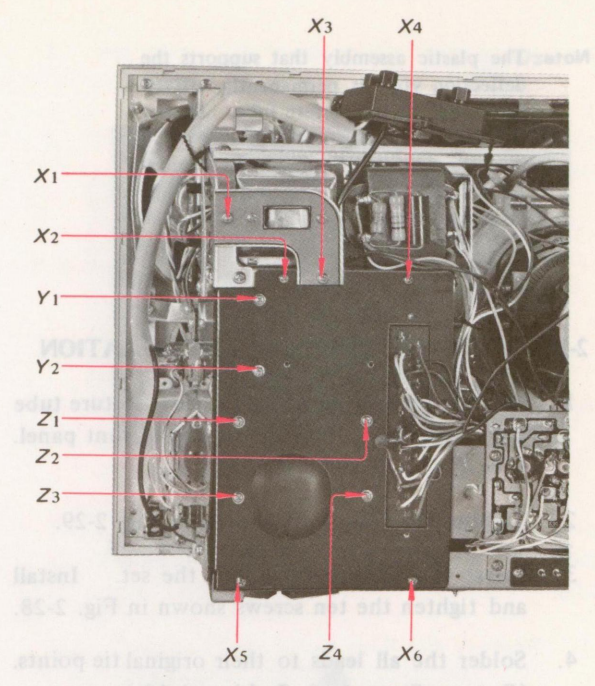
Screws for removal of the rear cover, horizontal output transformer and flyback transformer
